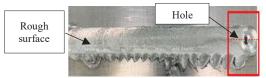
welding surface when welded at 750 rpm welding rotation and welding speed of 20 mm / min
